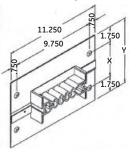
Floor/Wall Flange Cutout and Drilling Detail
